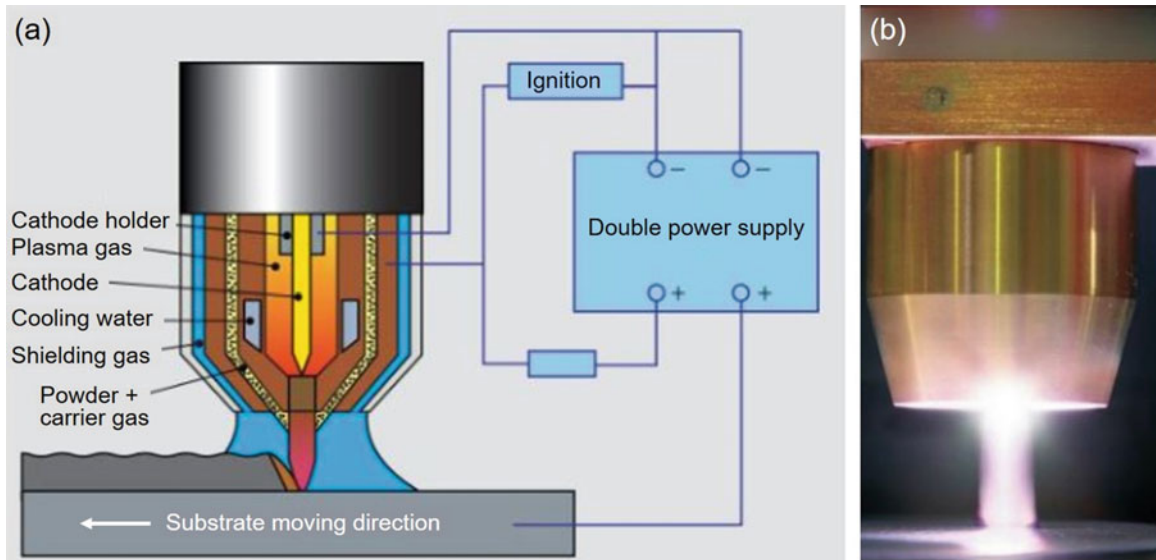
(a) Schematic and (b) photograph of PTA welding/over laying plasma torch by Castelin Eutectic Corp. [www.eutectic.com]
